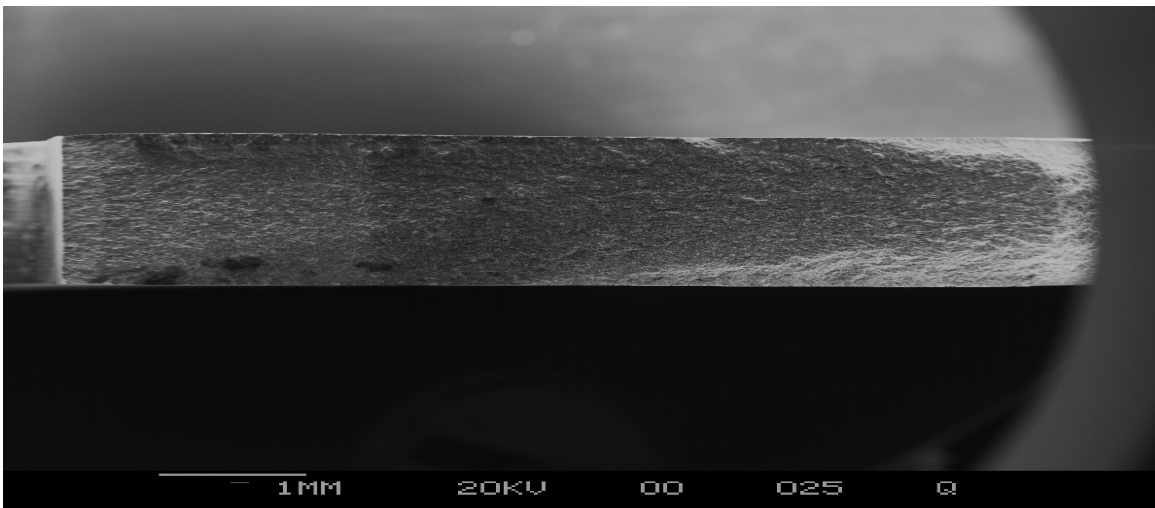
Fracture surface of specimen 1-S showing entire fatigue area
